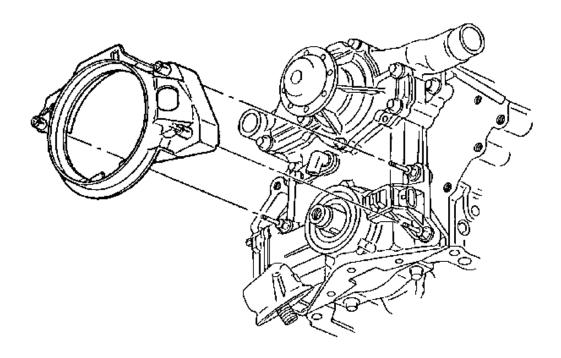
Identifying Crankshaft Front Oil Seal Courtesy of GENERAL MOTORS CORP.
